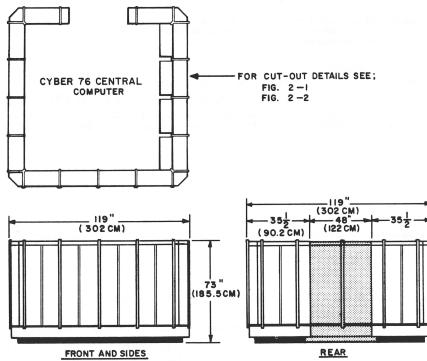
Floor Plan Cutouts (Dimensioning Reference: Simiconductor Version)
